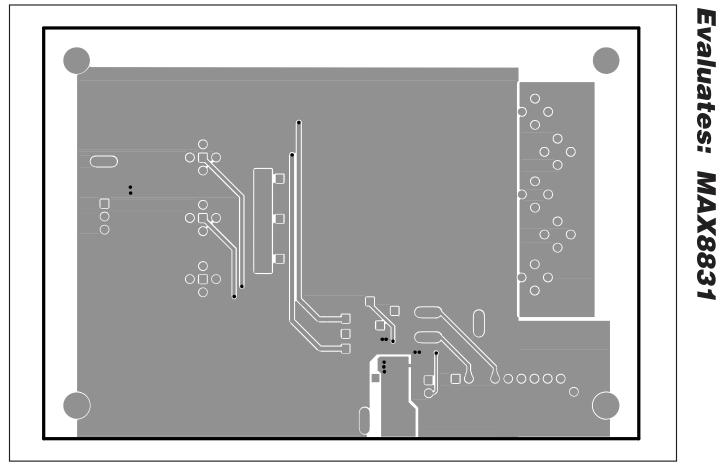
MAX8831 EV Kit PCB Layout—Solder Side
